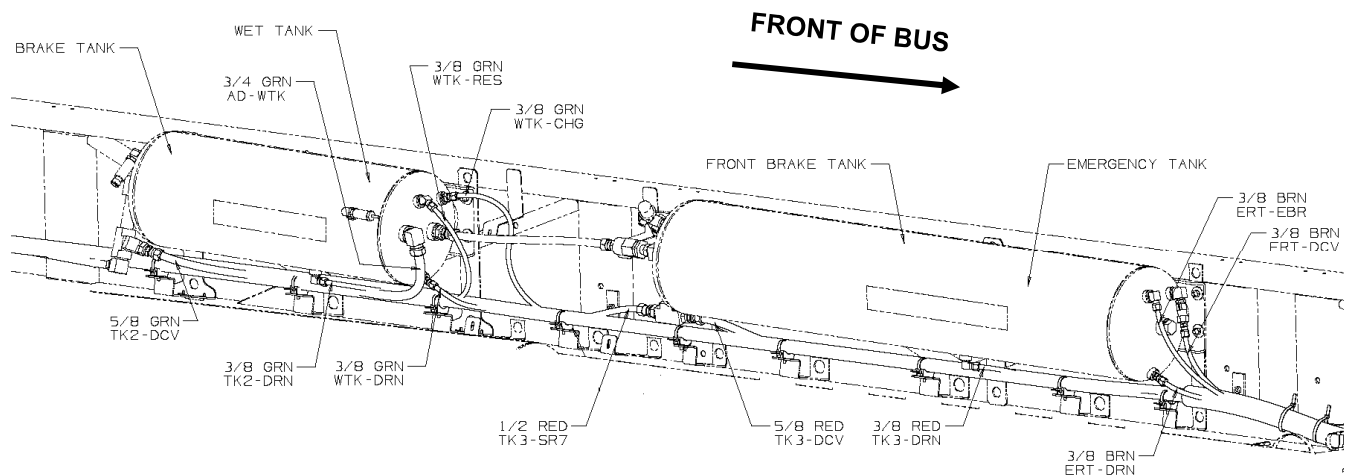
Location of DCV Valve and Existing Tee Fitting.
